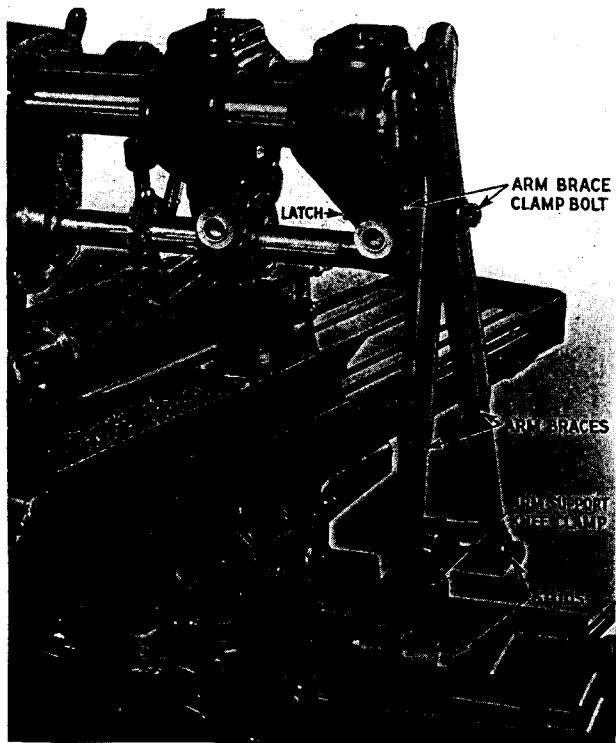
A typical set-up showing arm braces in use with outer arbor yoke. The set-up illustrated gives maximum rigidity of cutter support, because (1) cutter is near spindle nose; (2) inner arbor yoke is used, and is located close to cutter; and (3) outer arbor yoke and arm braces rigidly tie overarms to knee, keeping vibration and deflection to a minimum.
